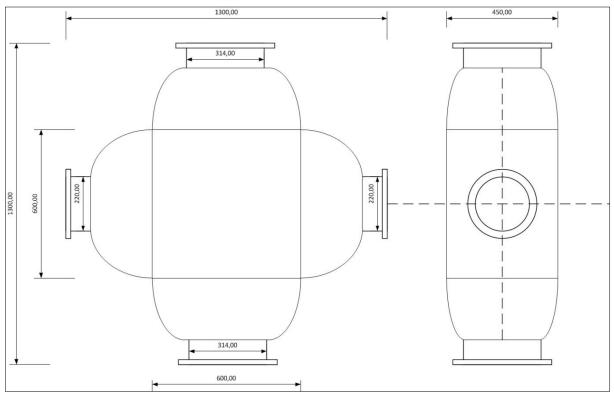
Direct cooling: printed circuit dimensions, with heads and nozzles
